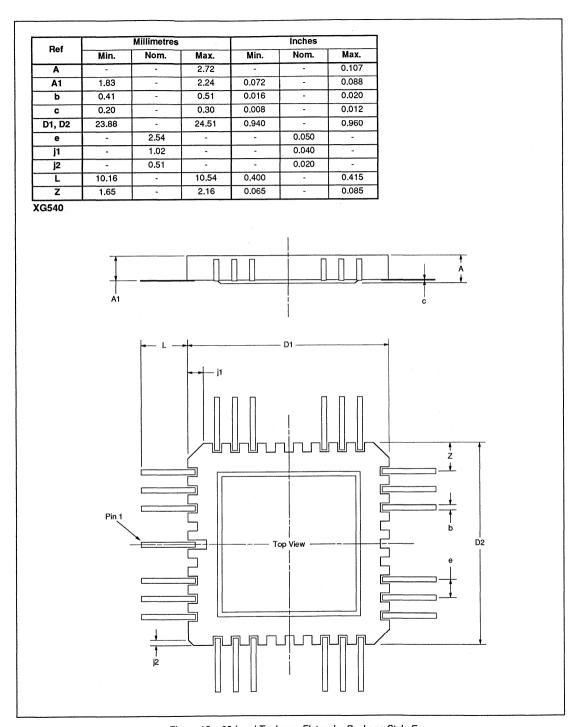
68-Lead Topbraze Flatpack - Package Style F
